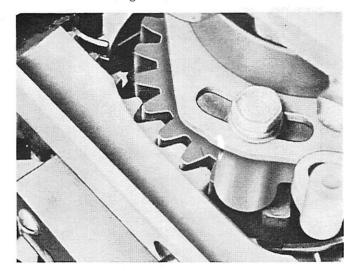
Nylon Rack and Distributor Sector Gear in Full Reverse Position
